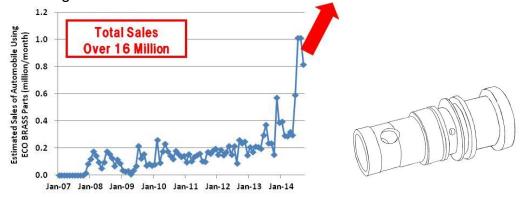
Sales of Control Valve for Variable Displacement Air-conditioner Compressor and Drawing
